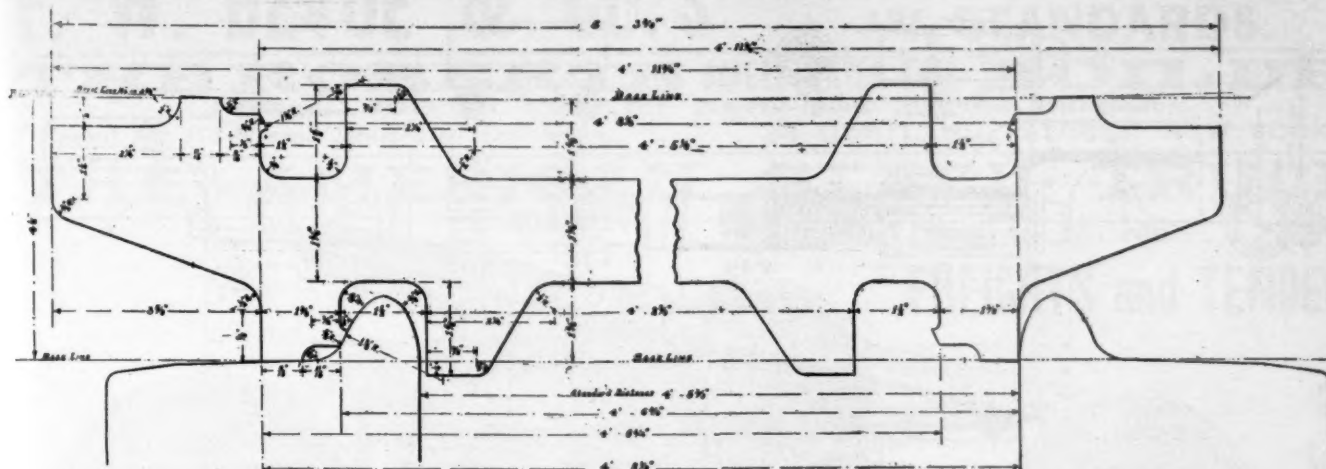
Standard Reference Gage for Mounting and Inspecting Wheels.
